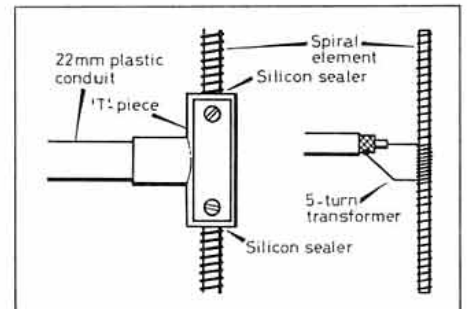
Constructional details of the spirally-wound antenna elements and coupling transformers (which must be wound over the electrical centre of the dipole elements).
